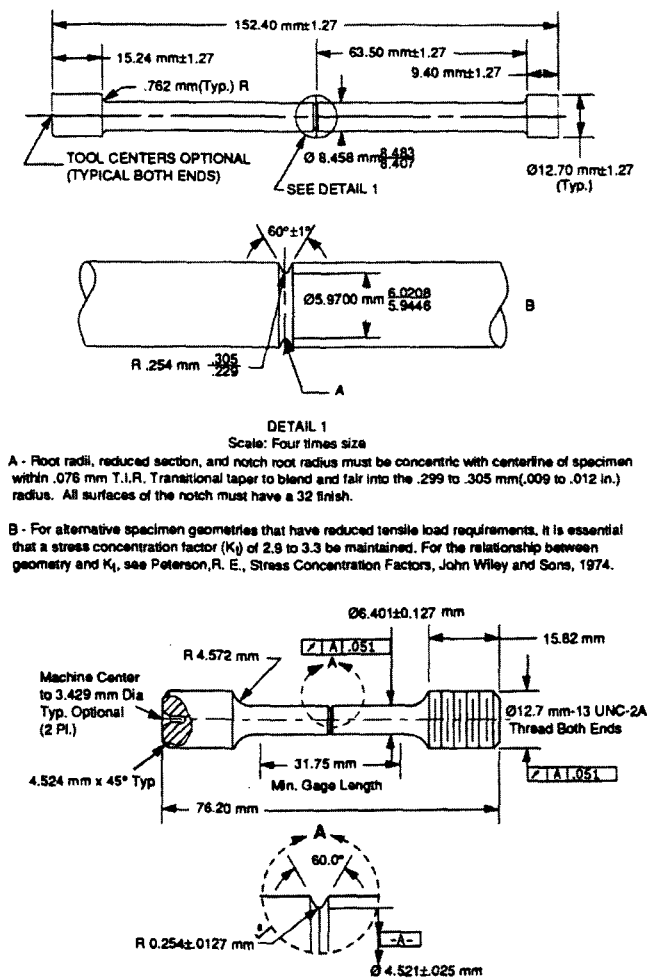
Dimensional requirements for Type 1a specimens (reprinted from ASTM F 519, Type 1a).
